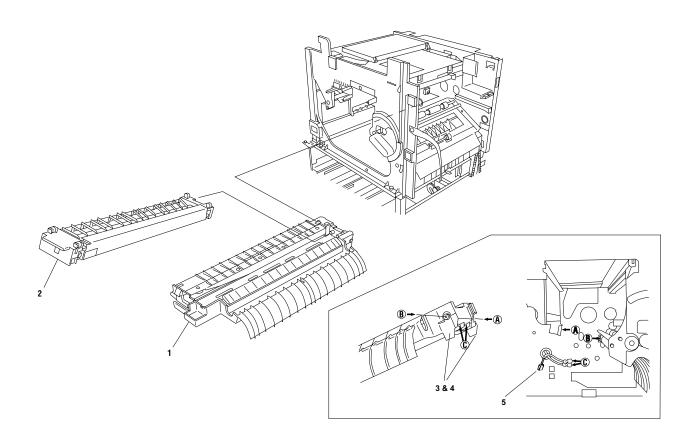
Transfer Guide Assembly Parts Locational Diagram
